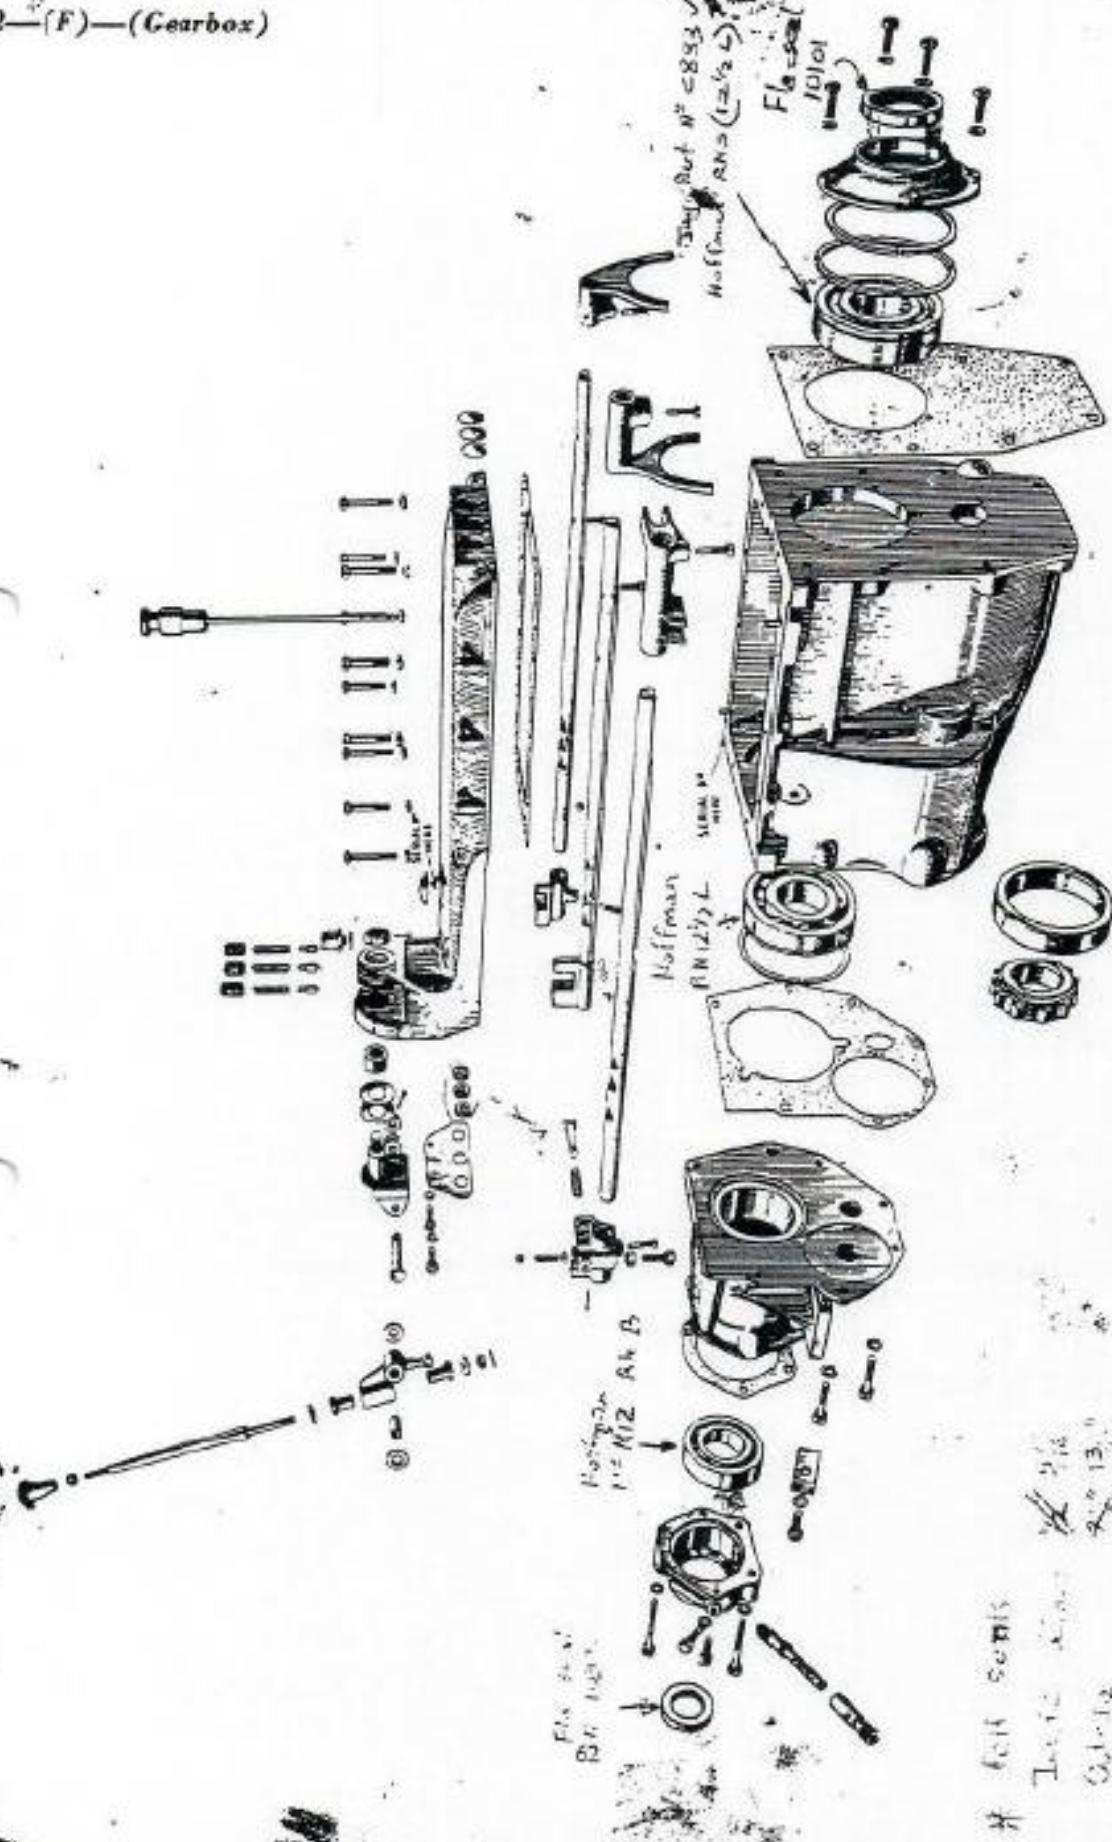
The gearbox top cover and casing (S.H. and J.H. Series).
